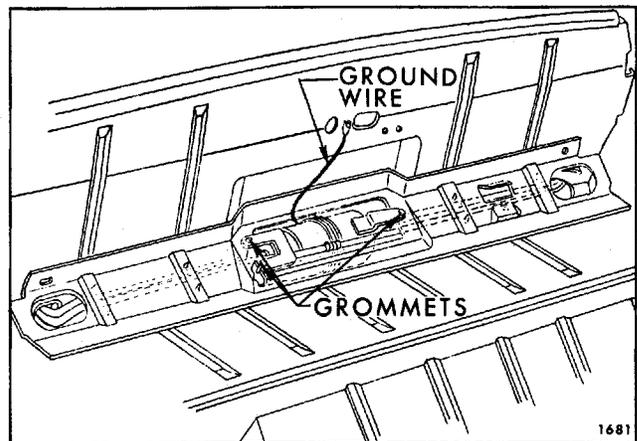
Hydro-Lectric Motor And Pump Assembly
